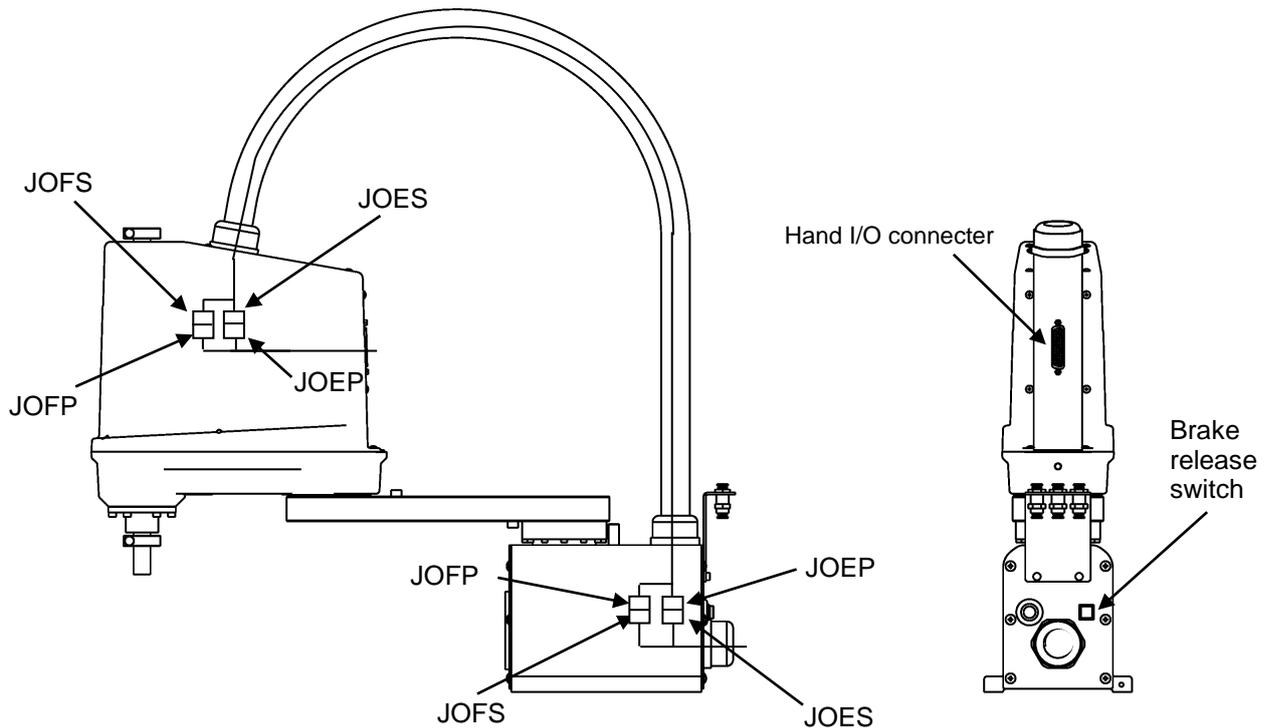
Tool wiring (KHL-300 and KHL-400)
